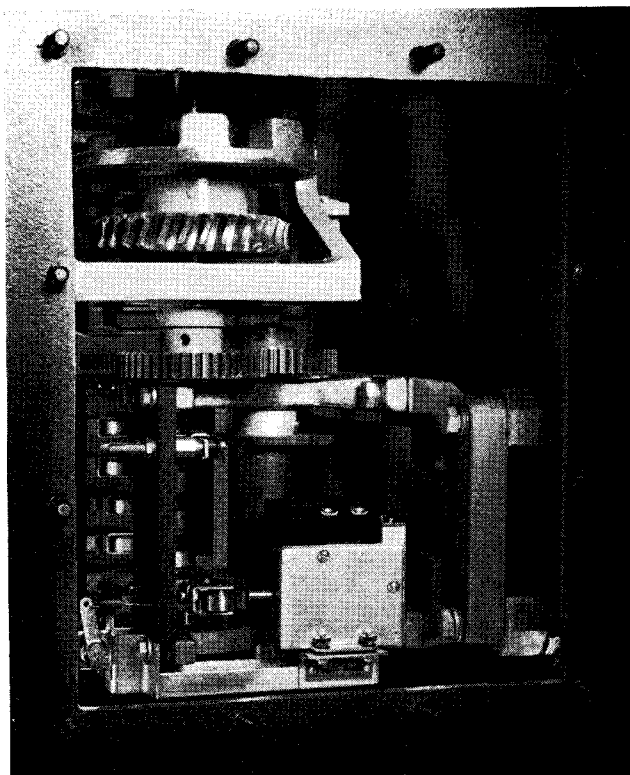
"DynAC Brake" As Installed on URS Cam Switch Assembly
